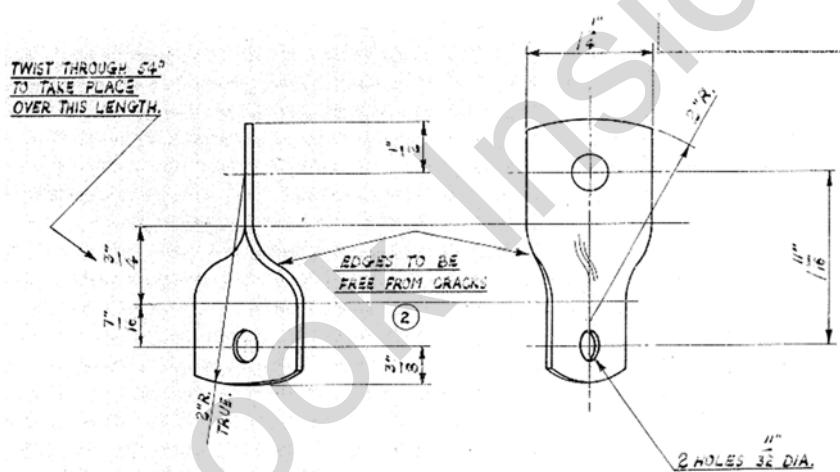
Exhaust pipe mounting 2A2200 and strap 2A2203.
